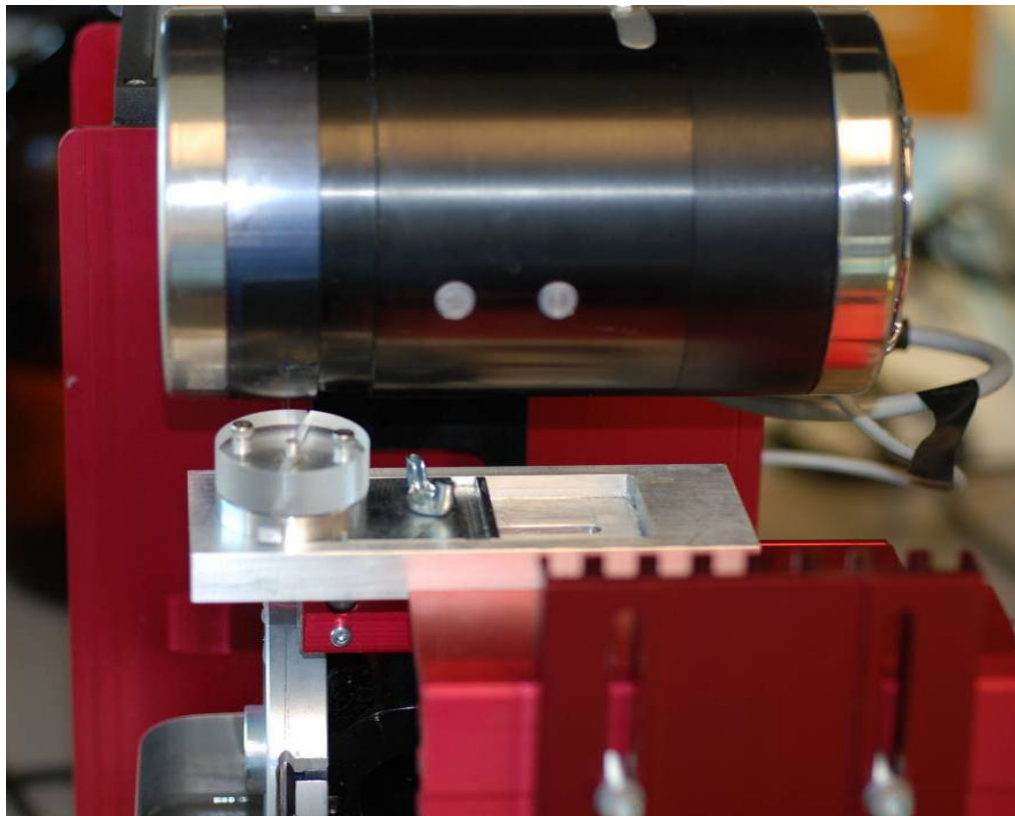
Diamond Wire Saw and Coring Fixture Assembly
